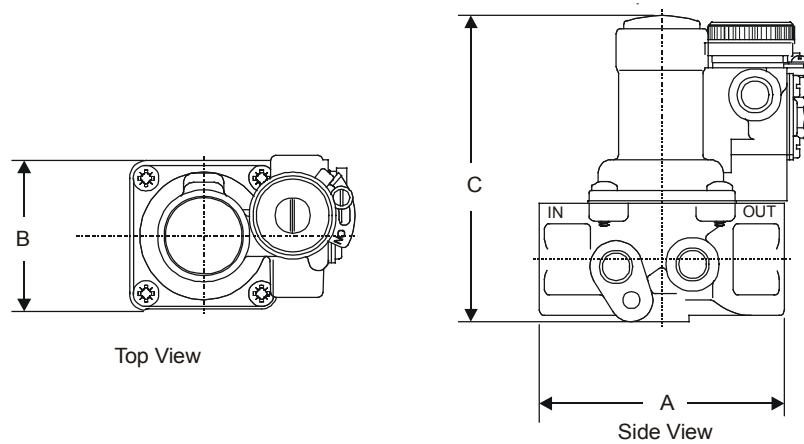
Internal Pilot Gas Valve with Rotor B Valve Dimensions
